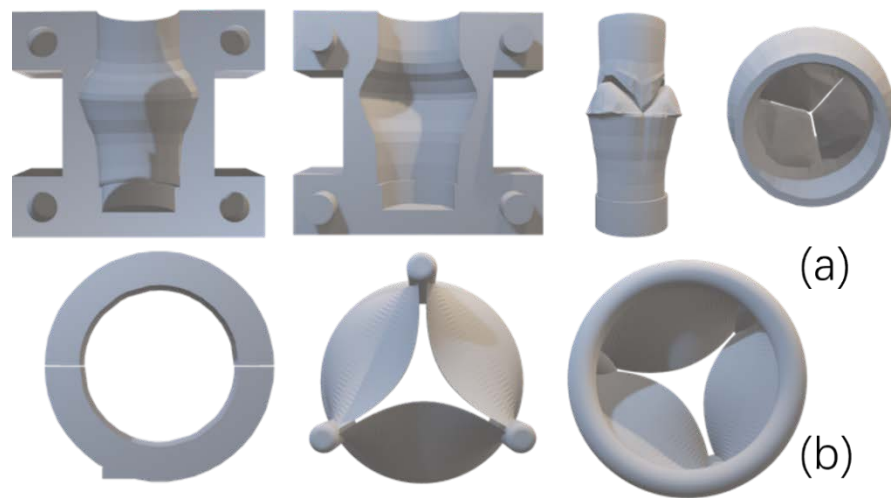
CAD Model of (a) moulded valve; (b) directly printed valve
